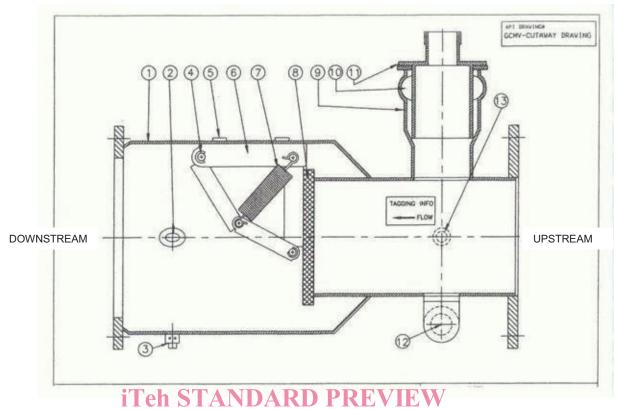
Cutaway drawing of a chemigation valve body assembly
